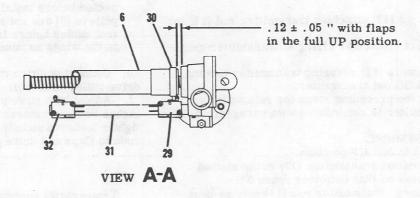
Flap Motor and Transmission Assembly (Sheet 2 of 3)
